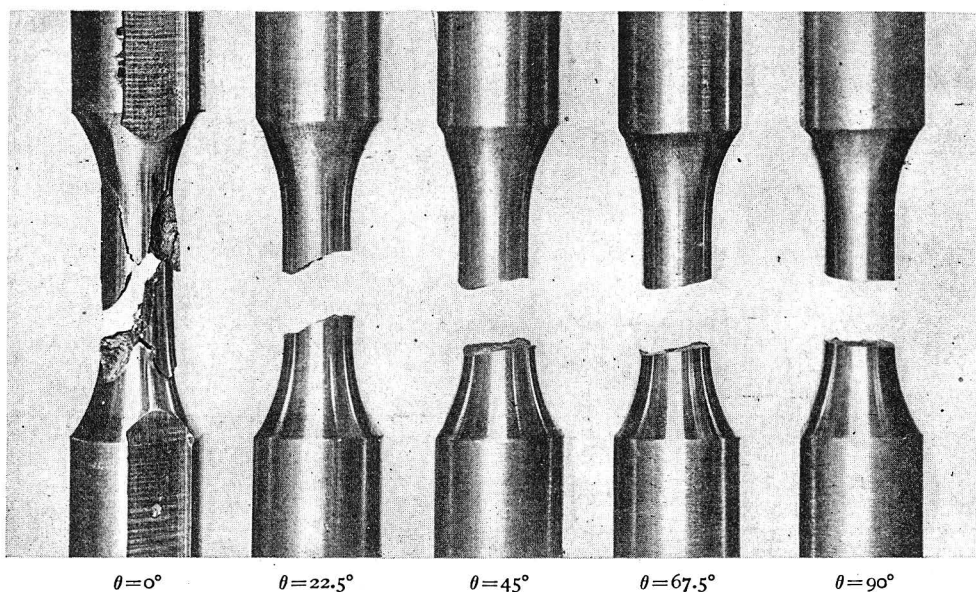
(a). Fatigue Fractures of Carbon Steels.
